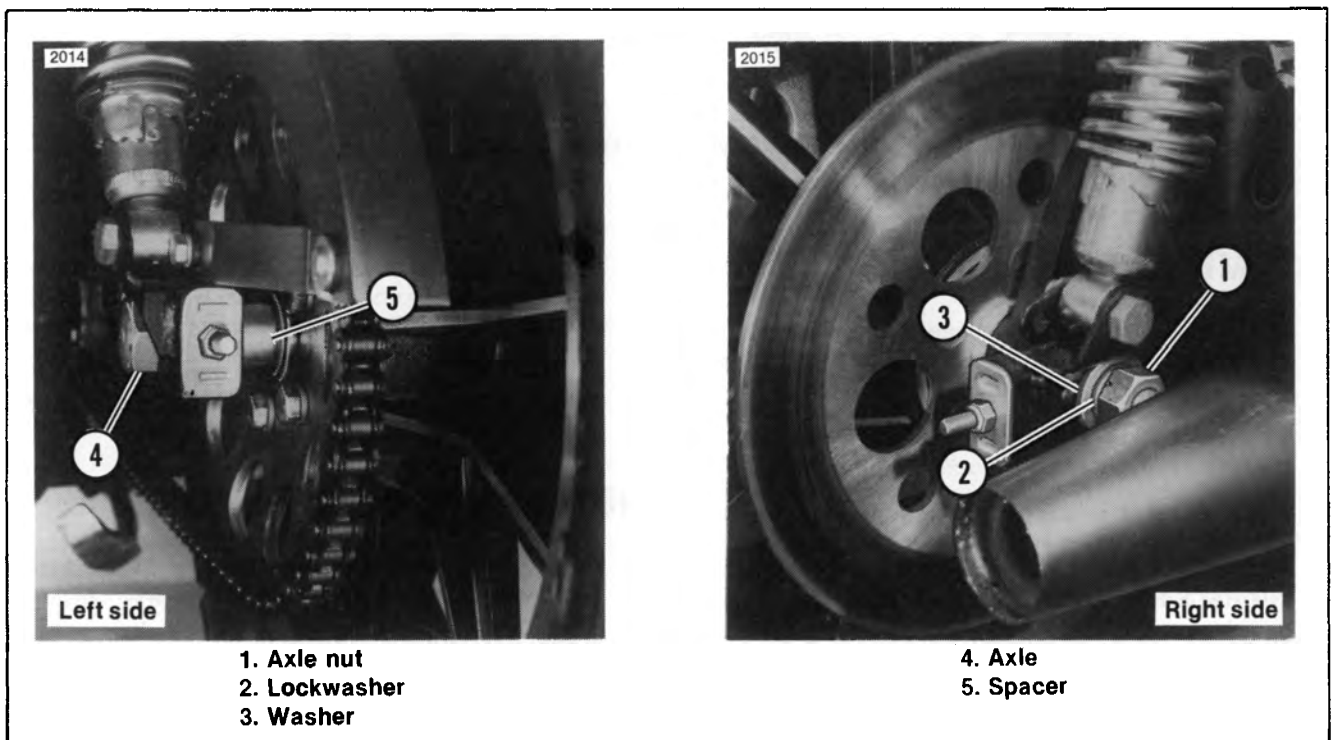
Rear Wheel Mounting Open Chain Drive
